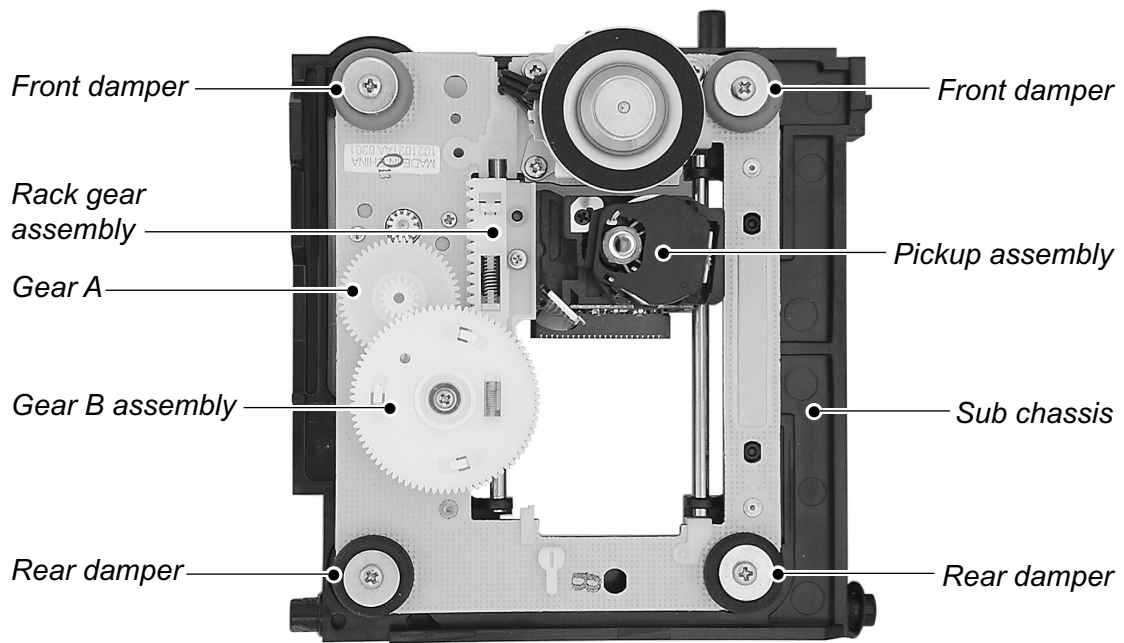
Pickup mechanism chassis assembly (Top side)
